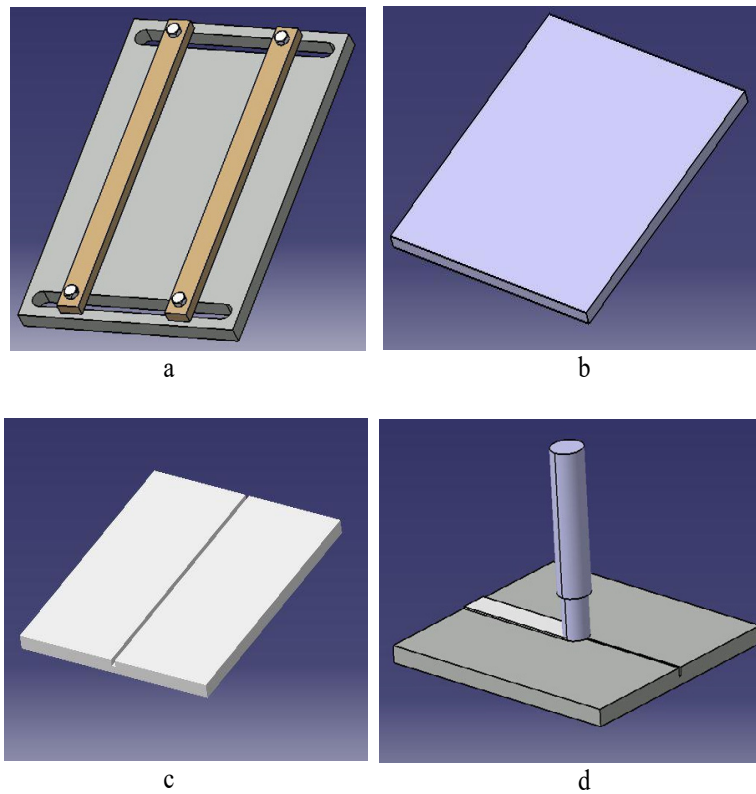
Schematic of FSP consist of (a) designed fixture, (b) aluminum sheet (c) the groove created on the sheet, and (d) the tool of friction stir processing.
